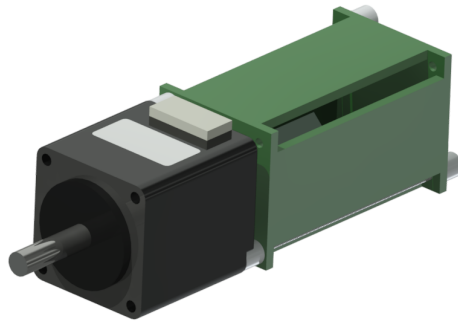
3D CAD drawing of the variable optical attenuators motor and driver unit.
